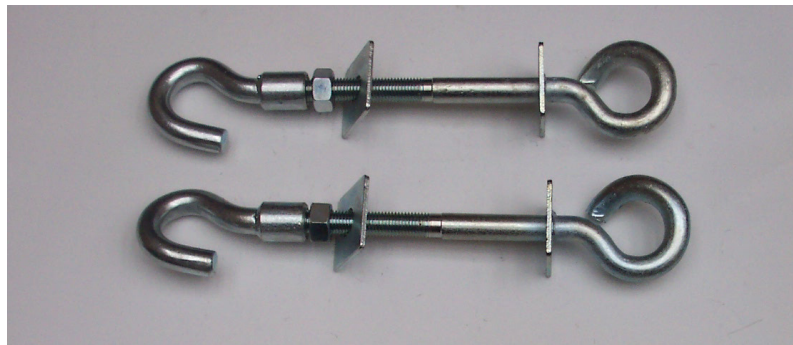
Nut hook M16 before the bending tests F_Y , hook-thread type.
